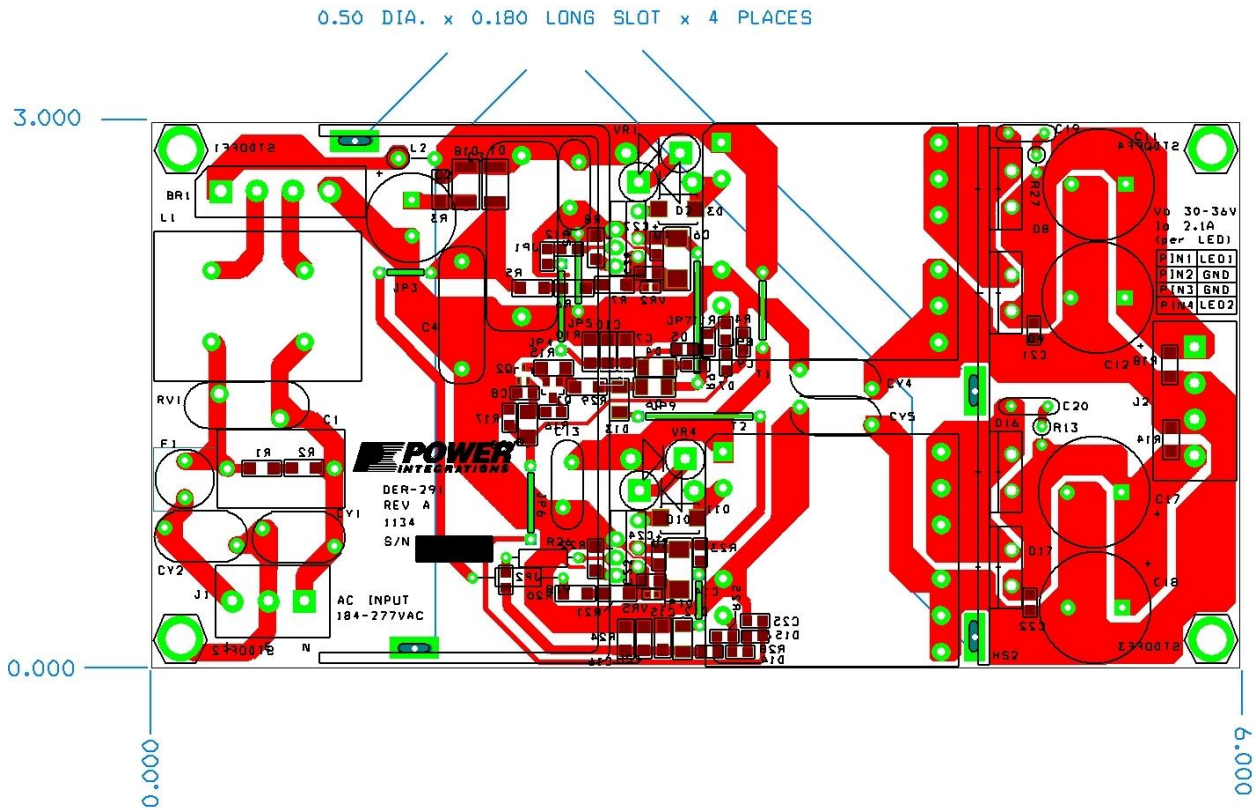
Printed Circuit Layout, Top and Bottom (3" x 6").
